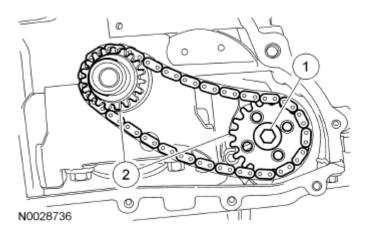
Identifying Bolt And Sprockets Courtesy of FORD MOTOR CO.
